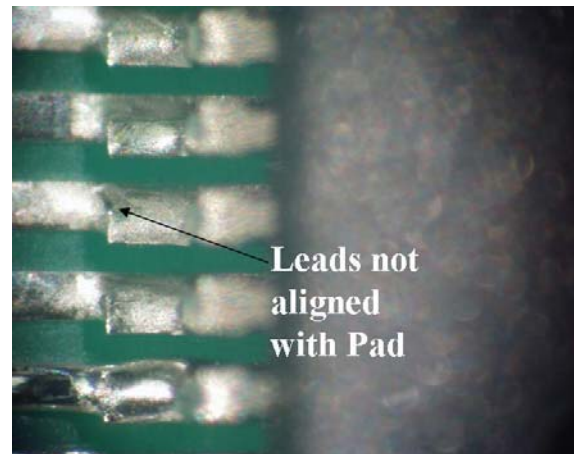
Lead not aligned with pad (QFP (tin-lead) repaired with Sn3.0Ag0.5Cu solder on HASL)
